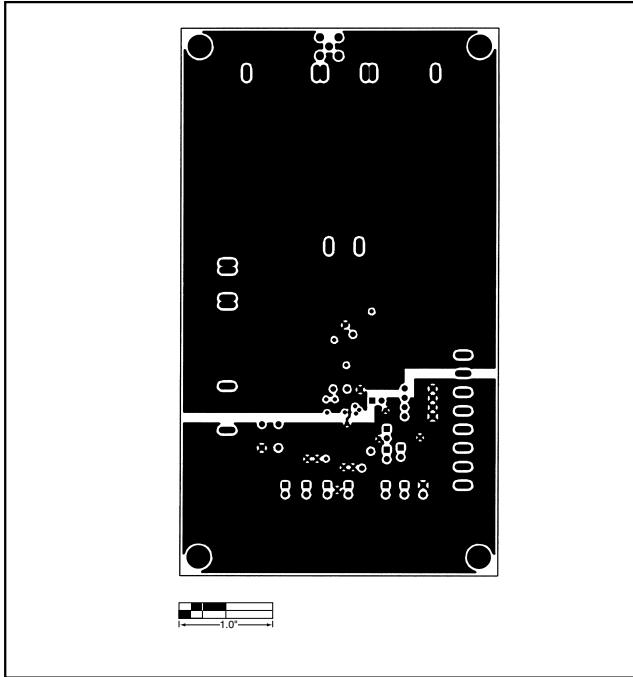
PC Board Layout—Internal GND Plane Layer 3
